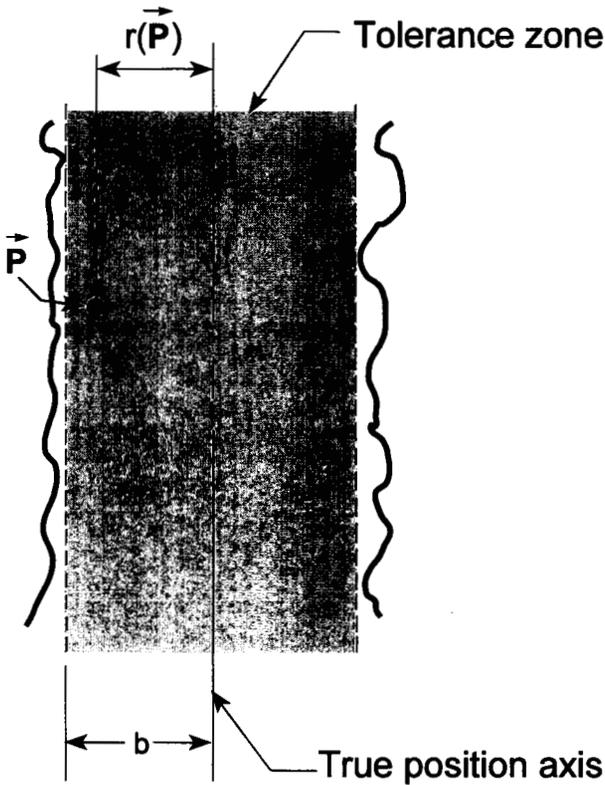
TOLERANCE ZONE AND CONFORMANCE: HOLES AT MMC OR RFS; SHAFTS AT LMC
